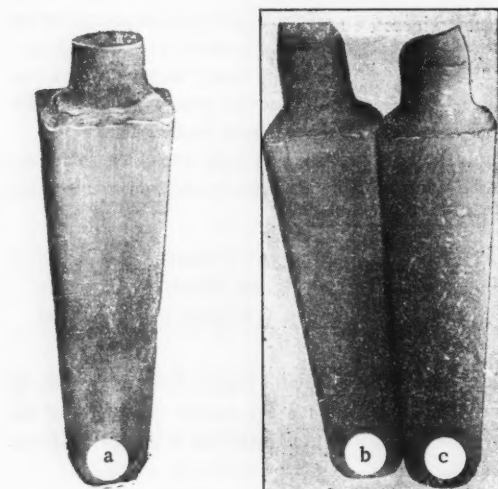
Steel ingots 65G weighing 3.5 tons, cast with mica added: a) before casting began; b) after casting began; c) without smearing the mold.
